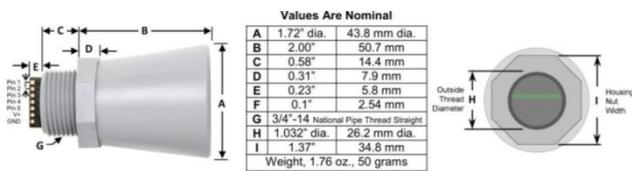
HRXL-MaxSonar®-WRS™ Mechanical Dimensions
